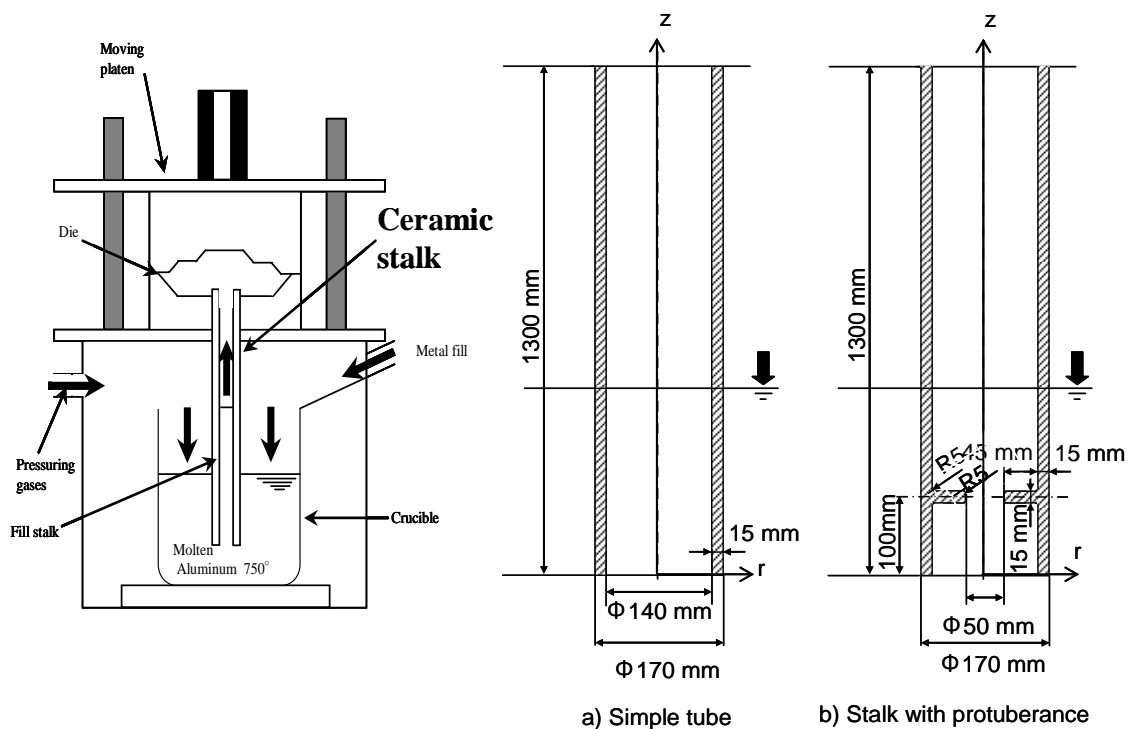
Schema of the low pressure die casting (LPDC) machine
